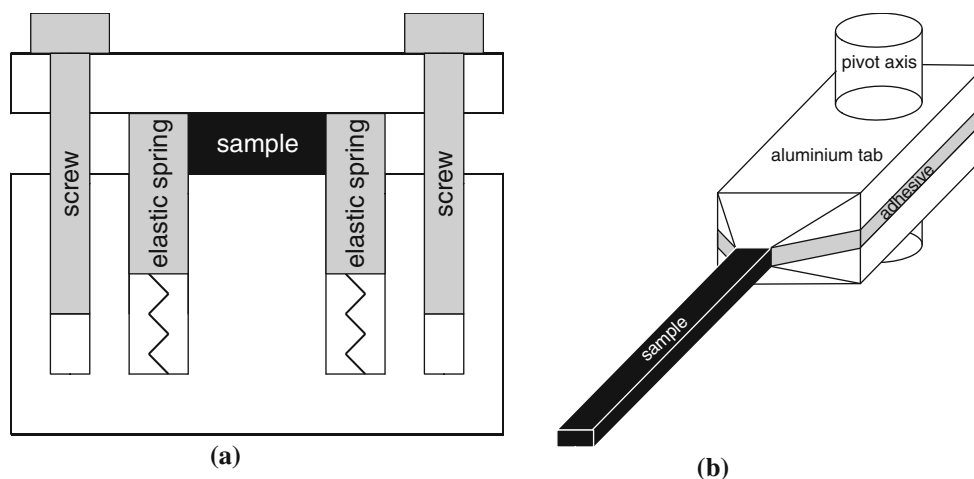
a Sectional view of minicomposite mould. b End-tapped tensile specimen
